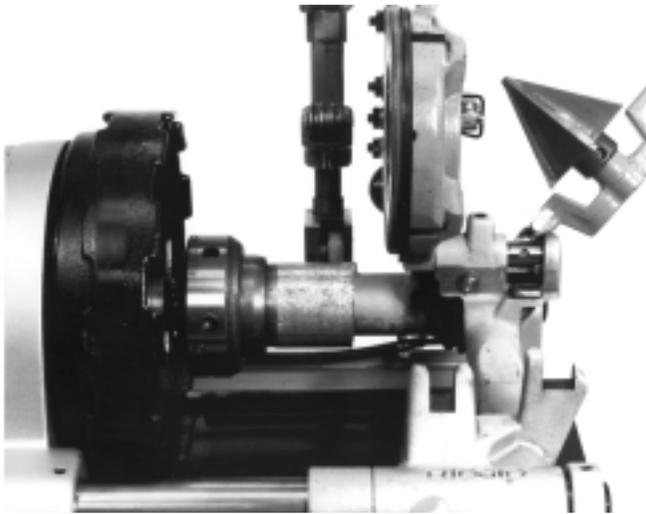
No. 819 Nipple Chuck Ready to Thread
